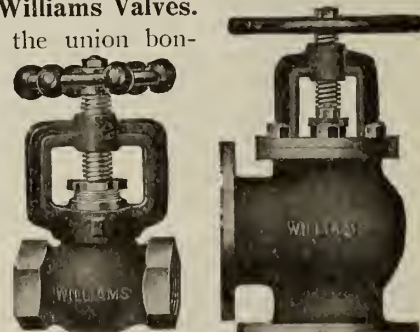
MEDIUM SCREWED YOKE TYPE			FIG. 397. MEDIUM FLANGED YOKE TYPE
